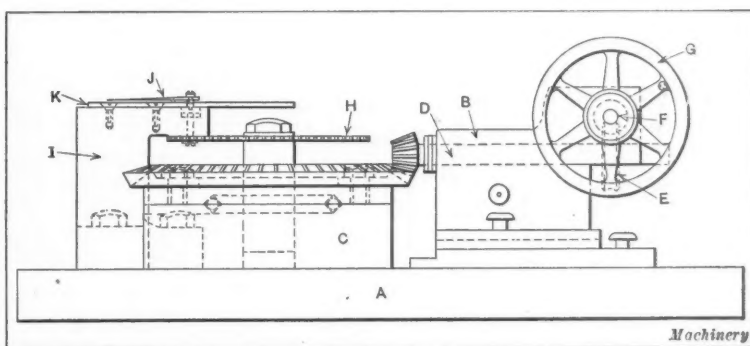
Special Fixture for testing Running Action of Bevel Ring Gear and Pinion
